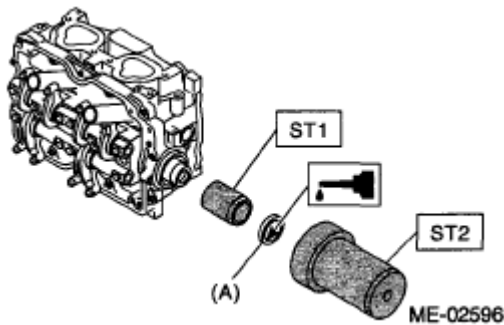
Applying Coat Of Engine Oil To Camshaft Oil Seal Periphery And Oil Seal Lips
